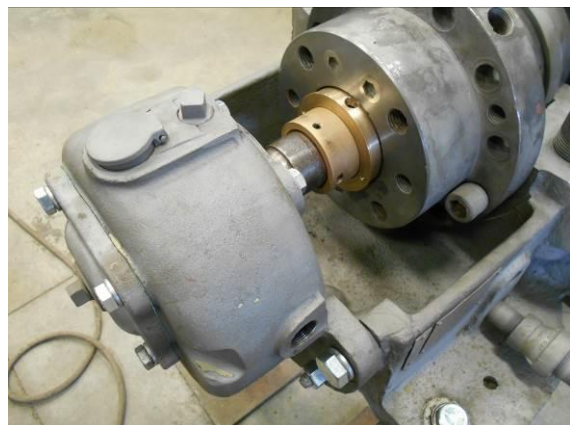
Thrust End Bearing Housing Cleaned and Installed
